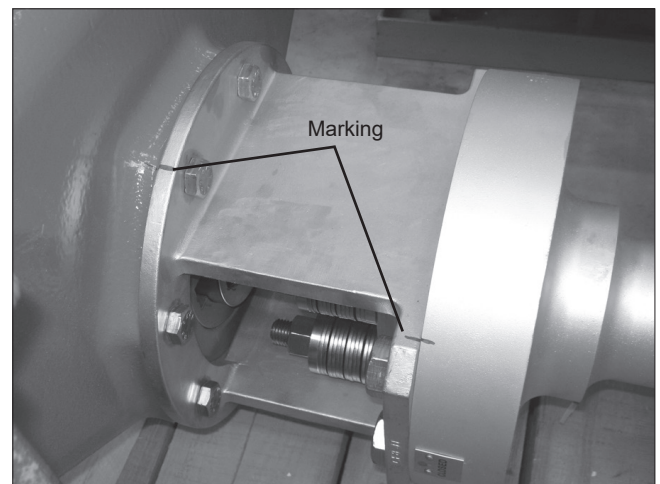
Before detaching the actuator, tag its position to the shaft and the disc on the bracket.
